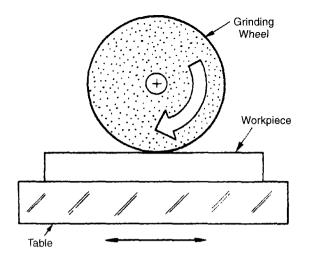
Grinding. The cutting 'tool' is the sharp facet of an abrasive grain; the process is a sort of micro-machining.
